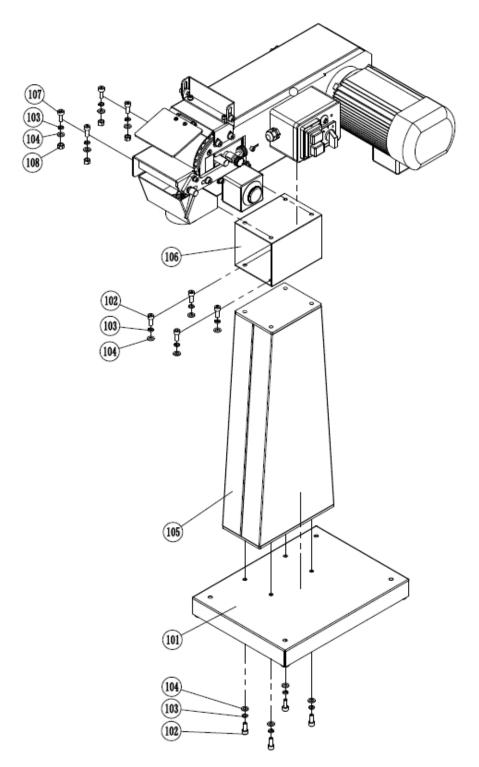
Spare parts drawing 1 MBSM 100-140-1 230V and MBSM 100-140-2 400V
